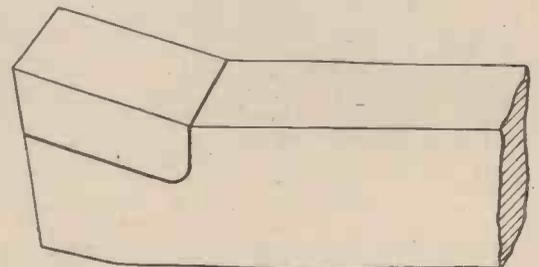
A steel-tipped tool. The tip is brazed on to a mild steel shank.
